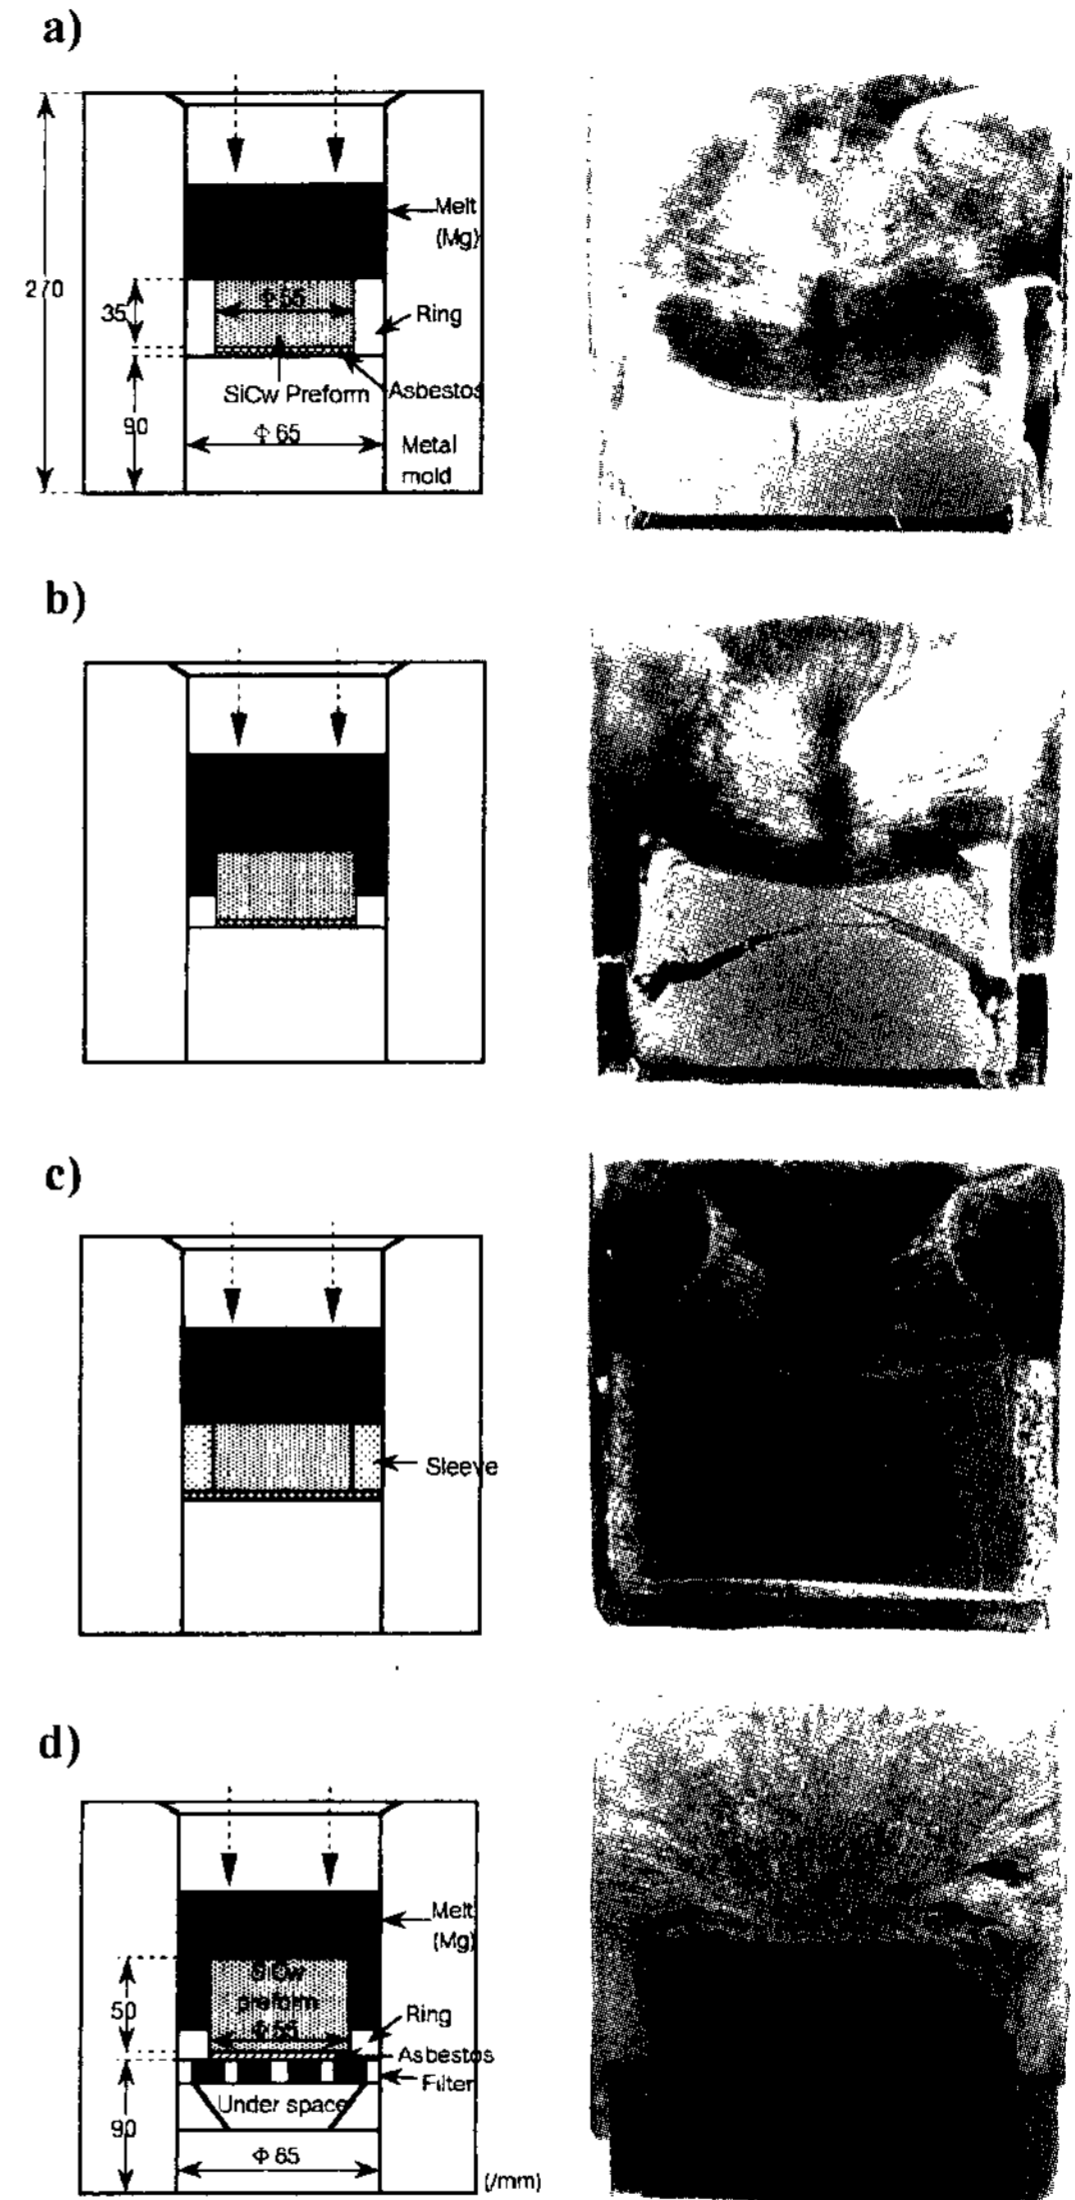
Schematic drawing of squeeze casting method and macrostructures of the obtained composites; a) specimen A, b) specimen B, c) specimen C, d) specimen D listed in Table 1.
